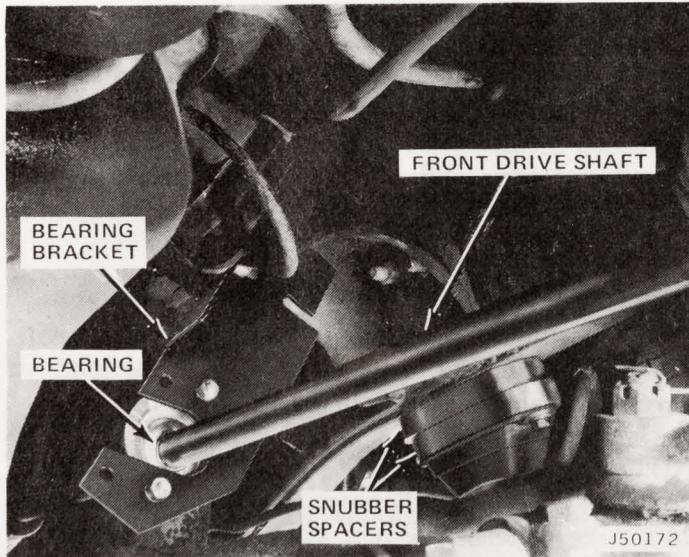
Bearing Bracket and Spacers Installed—Cherokee V-8 Engine
